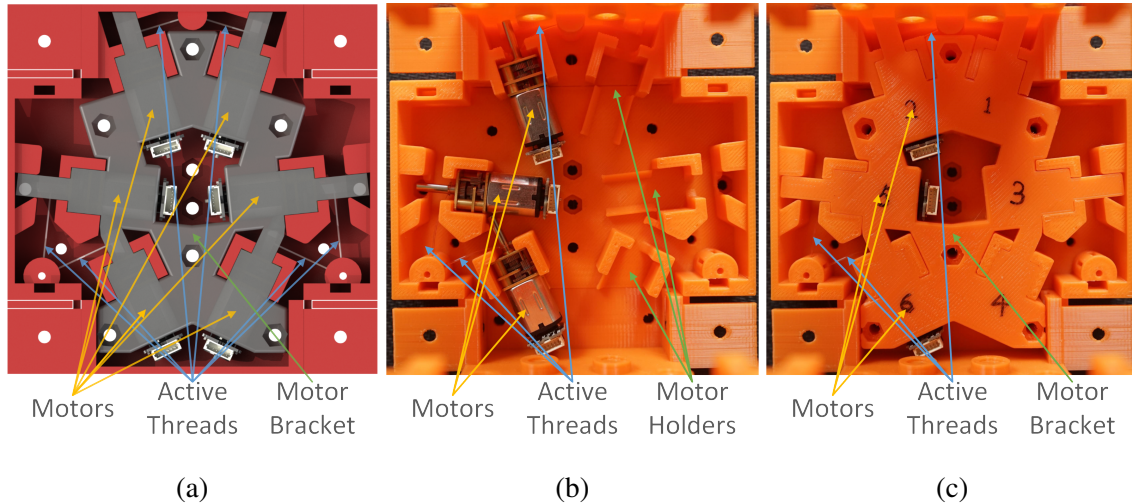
Arrangement and mounting of the motors. (a) The cross section view along the axial direction of the STeM showing the motor arrangement and thread routing, with the motor bracket rendered transparent. (b,c) The prototype with and without the motor bracket, with half of the motors populated.
